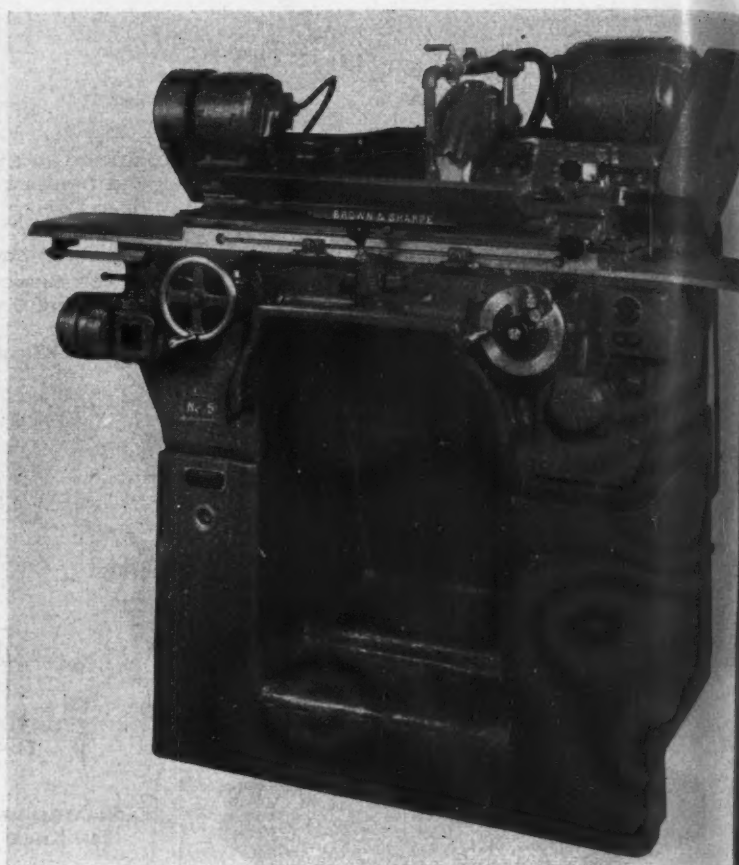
Above—Maximum ease of operation has been assured in this machine by locating all work-piece controls within a 36-inch zone at waist height. Knee hole permits convenient operation of the machine from a sitting position
